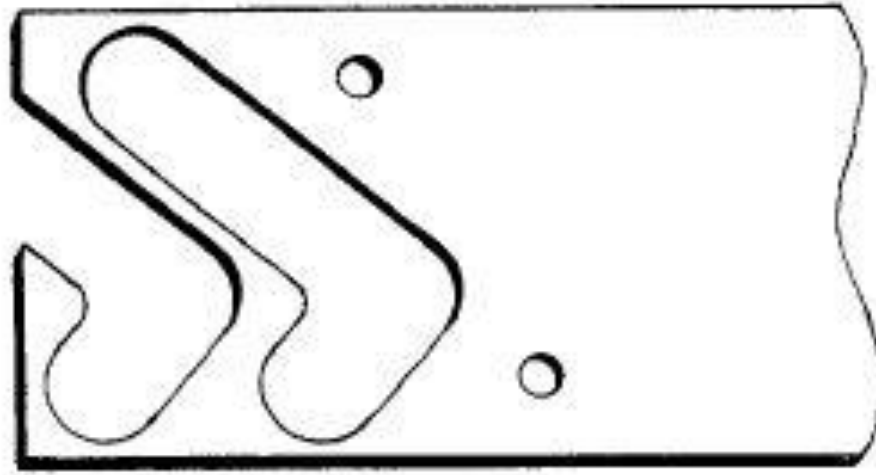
The resulting scrap strip and parts removed in testing the new layout.
